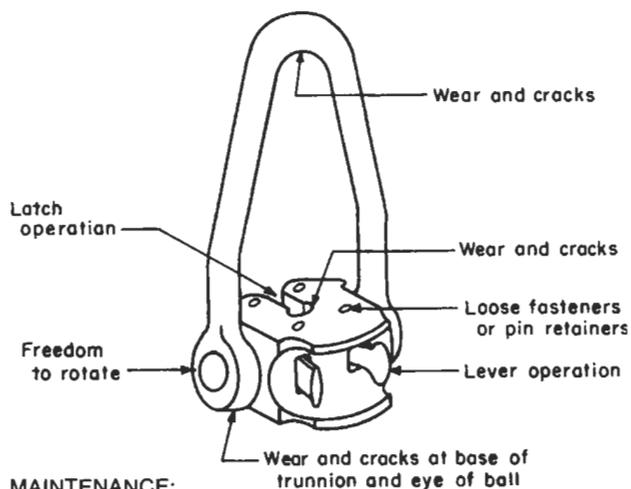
Casing, tubing, and drill pipe elevators, and center latch elevators [10].
